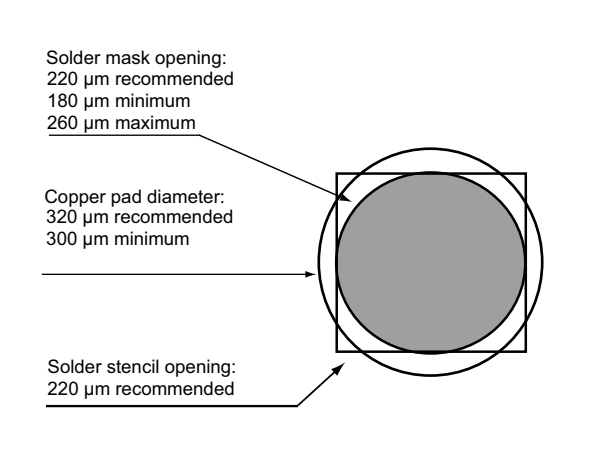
Footprint - 5 mils stencil - non solder mask defined
